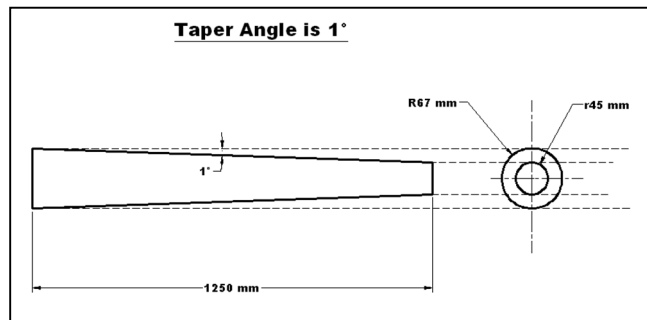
Geometry of a tapered drive shaft having taper angle  $1^\circ$ .
